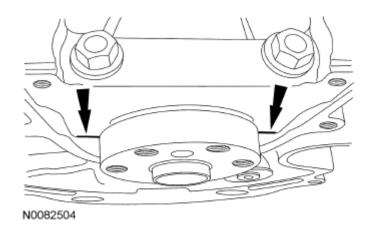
Locating Crankshaft Courtesy of FORD MOTOR CO.
